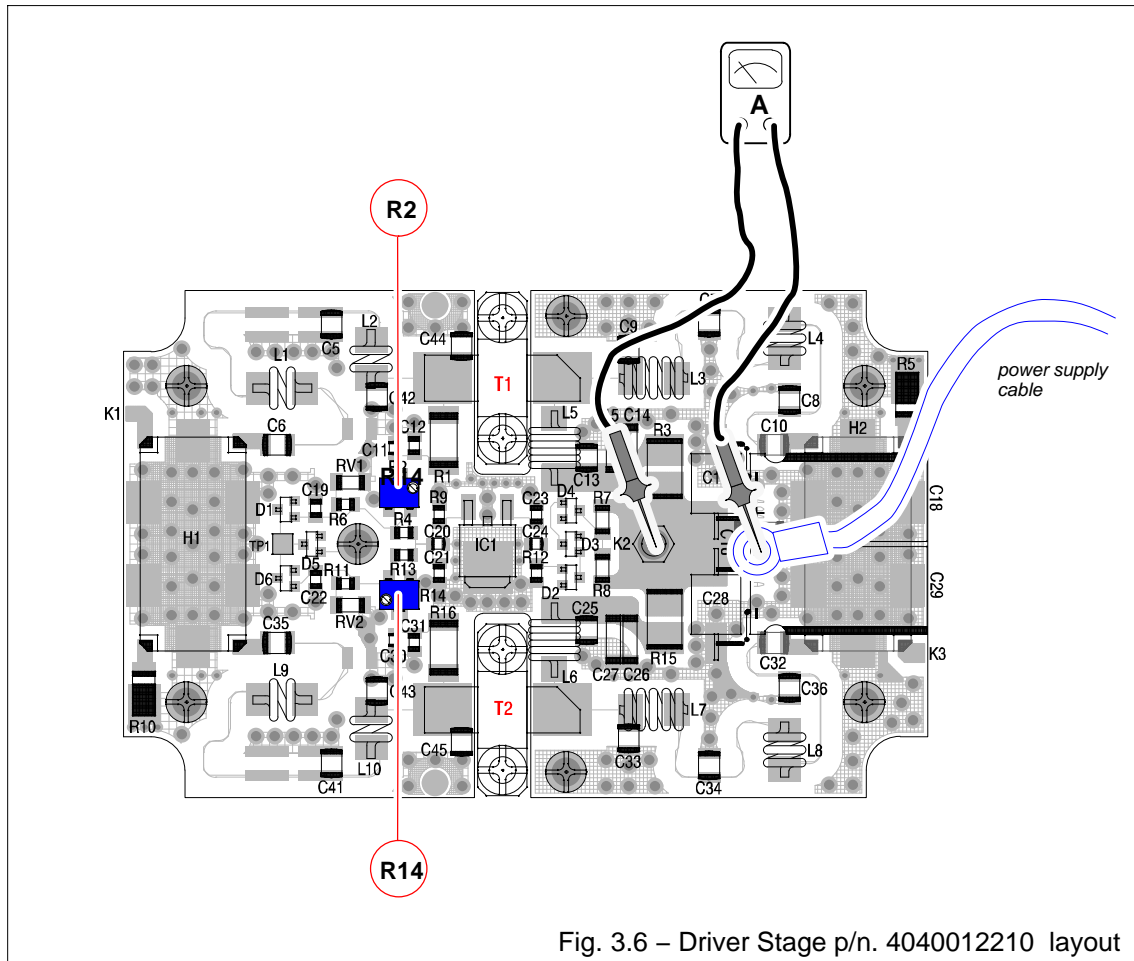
Driver Stage p/n. 4040012210 layout
